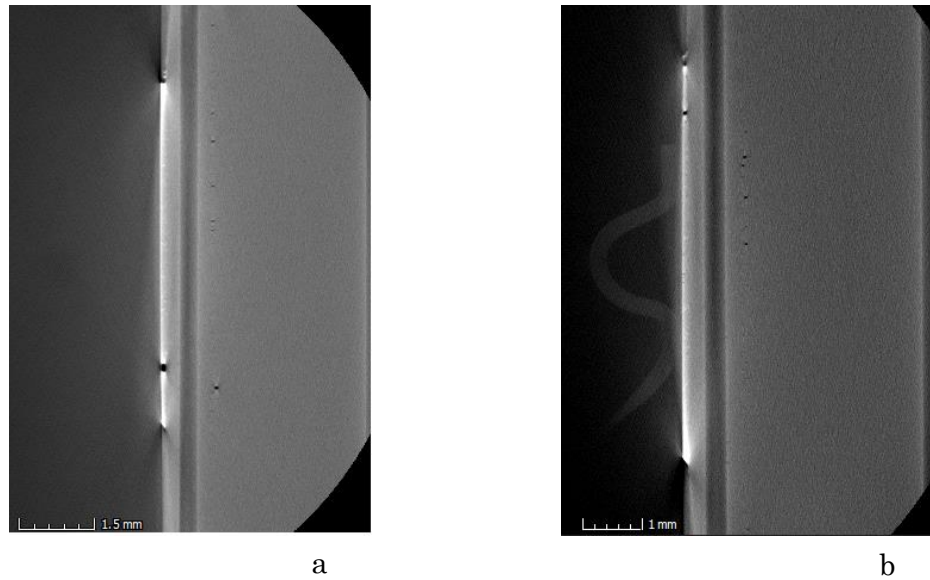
Side view examples – cross section of the thickness of die-attach solder: a/Module 1 – top IGBT; b/Module 2- bottom IGBT.
